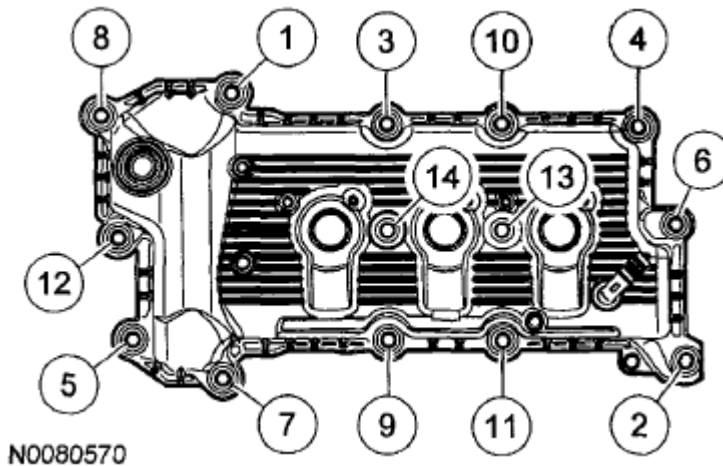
Identifying LH Valve Cover, Bolts And Stud Bolts
